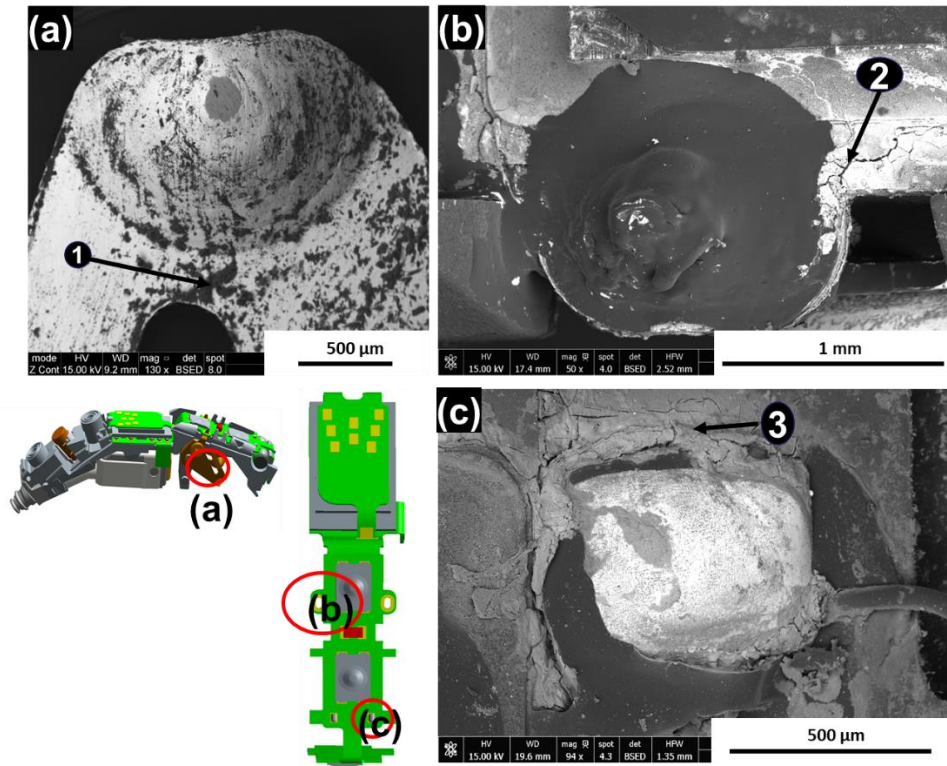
BSED electron images of Type 1 HA (K14) components showing corrosion on: (a) Battery contact, (b), (c) Hand solderings.
